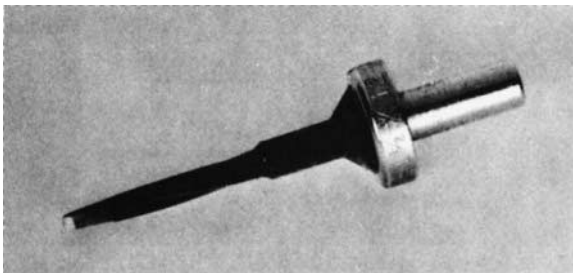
A tool for drilling pilot hole, shank-clearance hole, and countersink in one operation.
